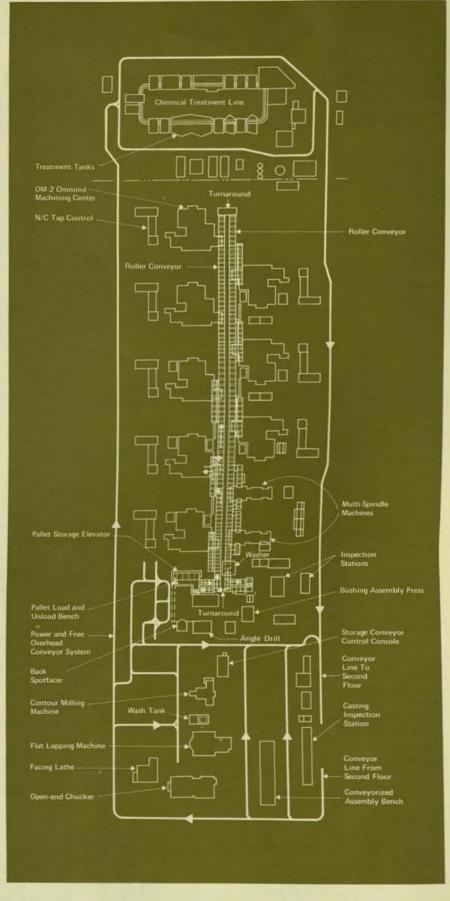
Programmed machining system integrates all machining fluorescent penetrant inspection, corrosion resistance treatment, and parts storage in three different areas. Areas are connected by a power-and-free overhead monorail conveyor.
